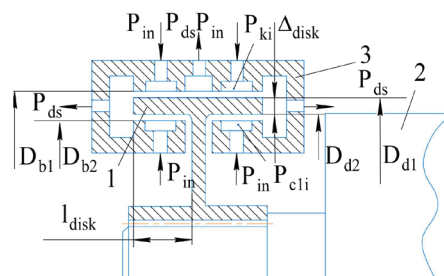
Schematic showing the radial hydrostatic dynamic bearing: 1 – bearing; 2 – disk; 3 – shaft
